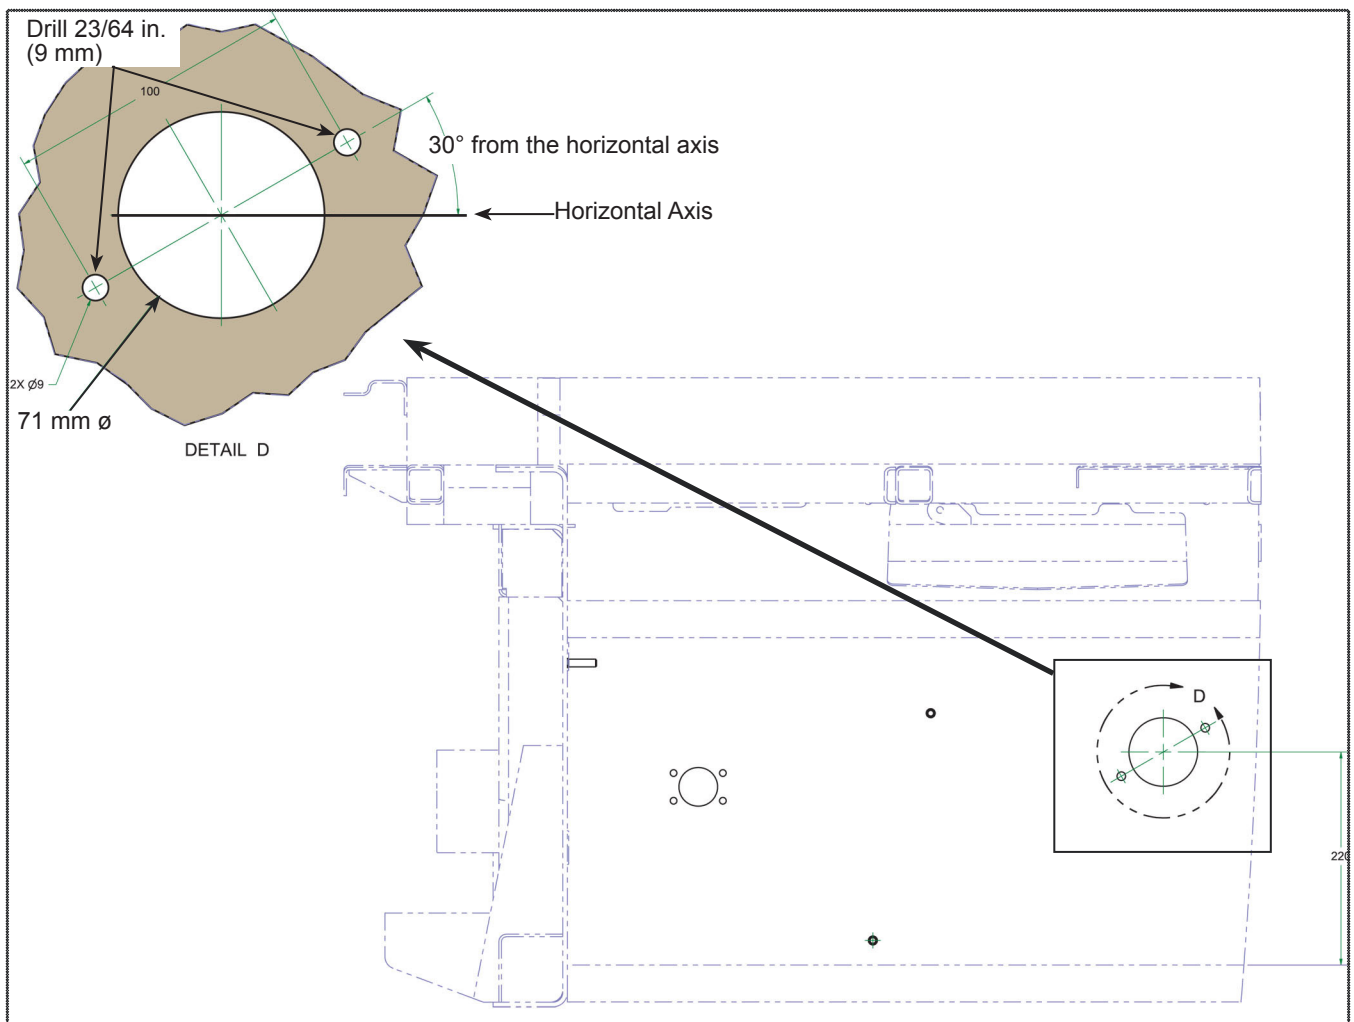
Dimensions for the Modified Hole and Locations of the Attachment Holes
